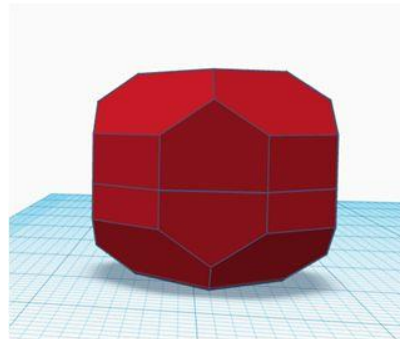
Multi-position mounting device (“3D design tumbling Sphere,” n.d.)
